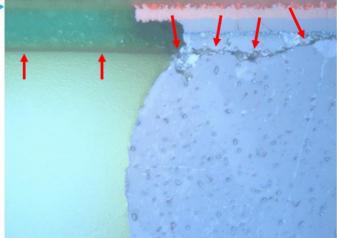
Optical view in cross-section of the underfill between solder joints: delamination at underfill/BGA interface generating cracks in the solder joints (red arrows)
